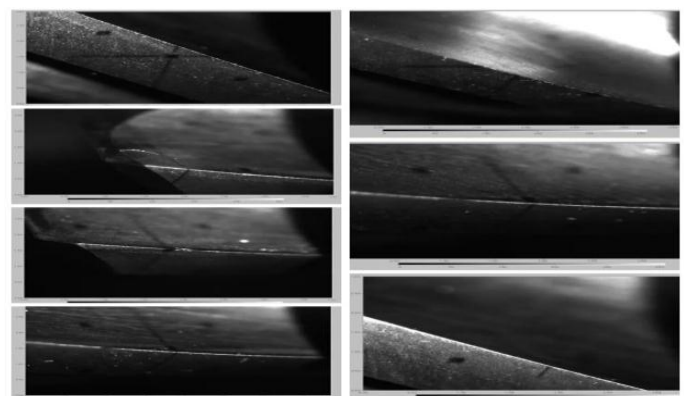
Preview of gradual tool wear using MahrSurf TS50 non-contact surface microscope
